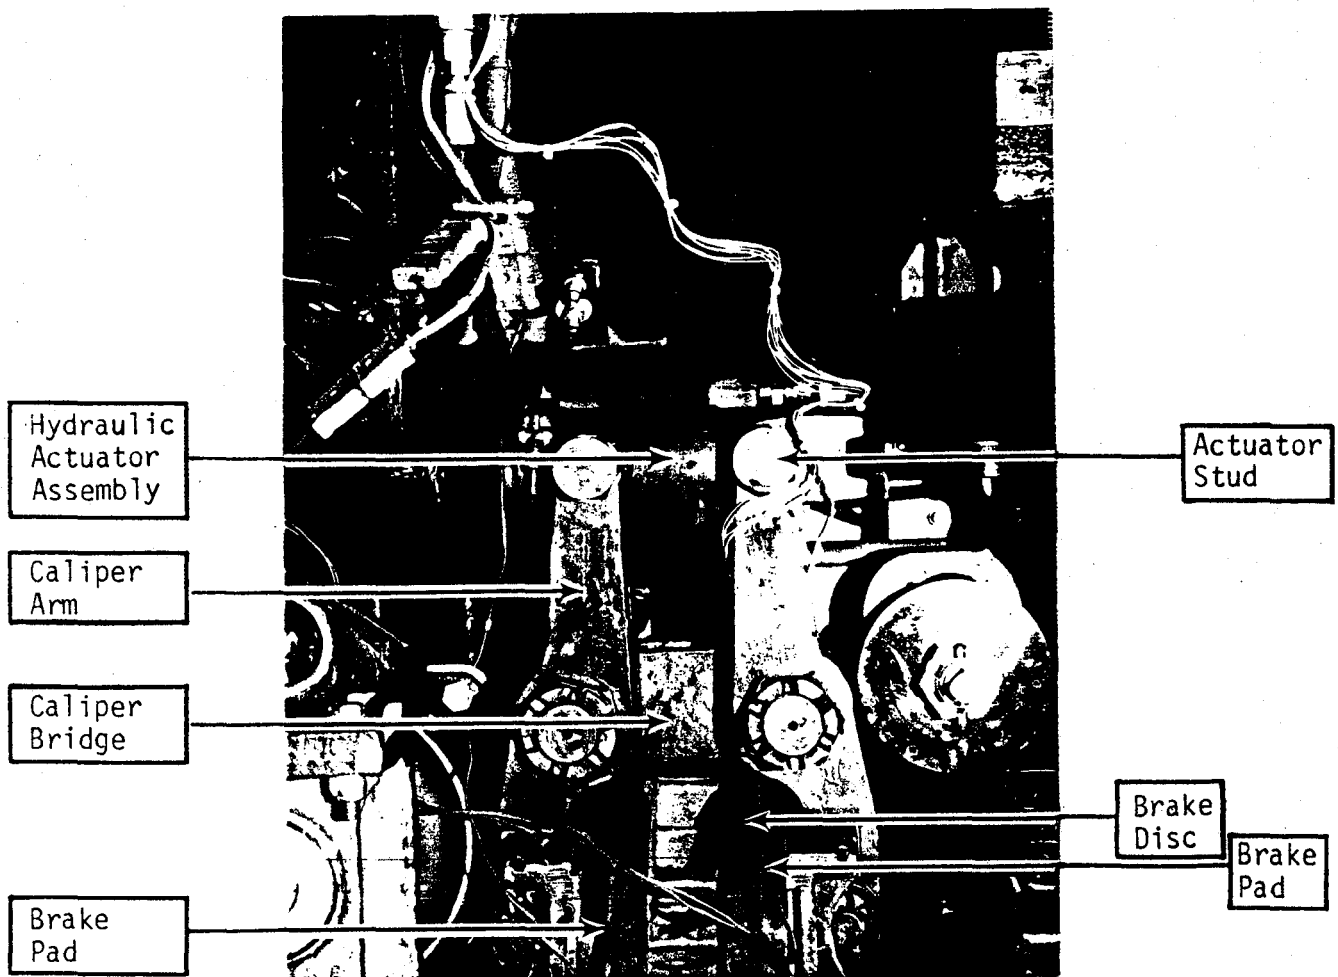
FRICTION BRAKE ASSEMBLY.
